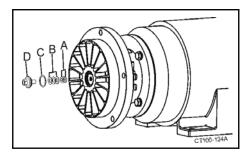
Remove Shims, Belleville Washers and Impeller Retainer
